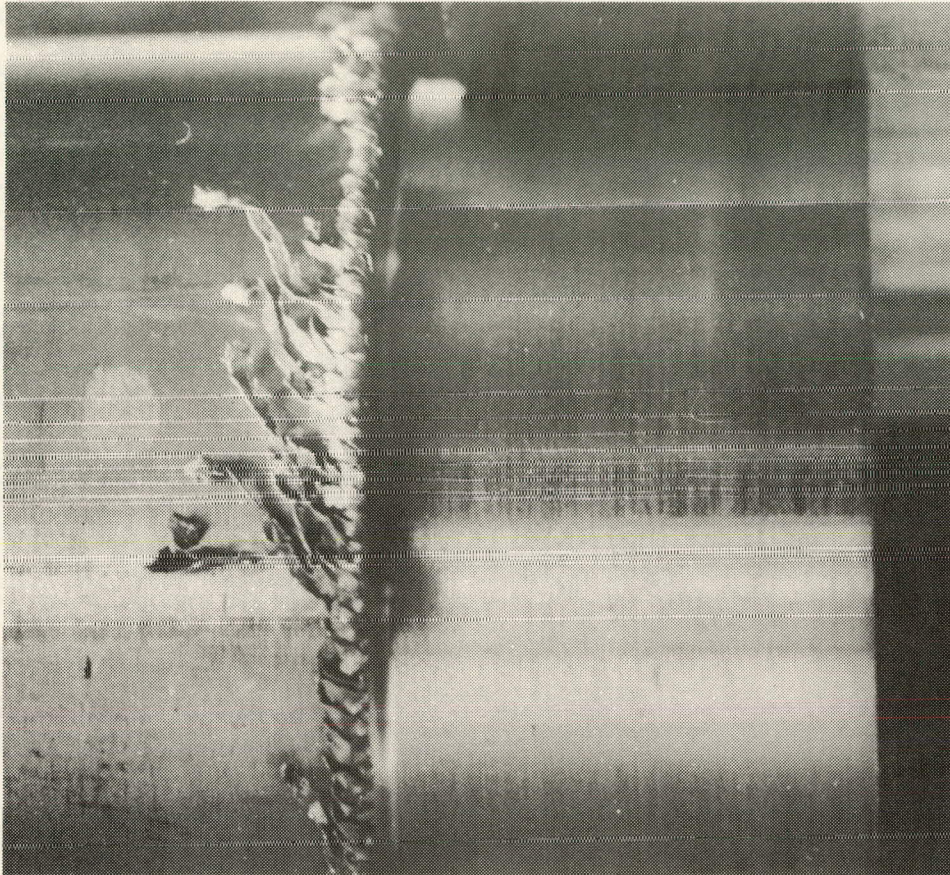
Unusually Long Burrs on Large Bar of 304 Stainless Steel
